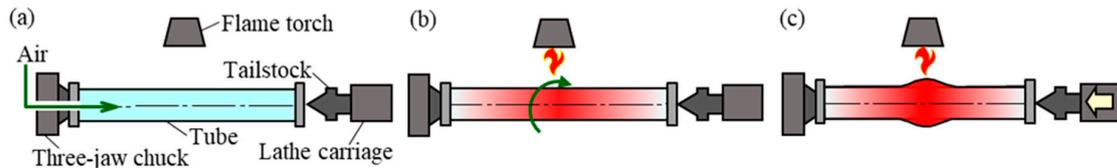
Sequence of hot gas forming of the tube using flame heating: (a) setup and charge with compressed air; (b) start of flame heating and rotating of tube; and (c) start of axial feeding.
